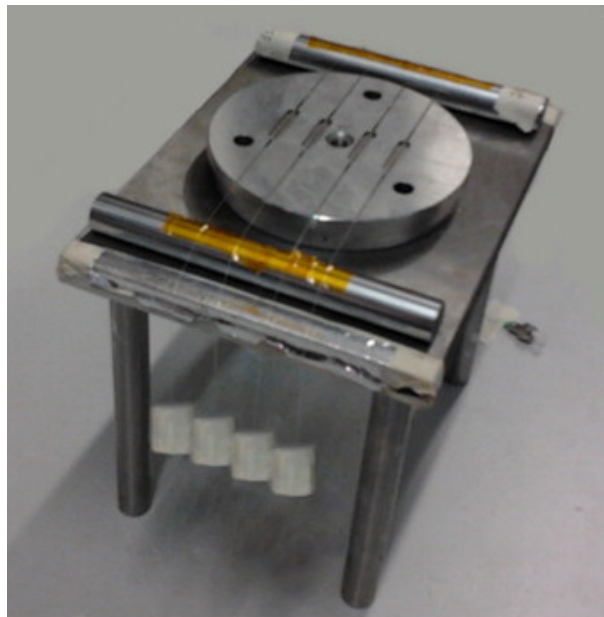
Mould setup for manufacturing of polymer coating FBG.
